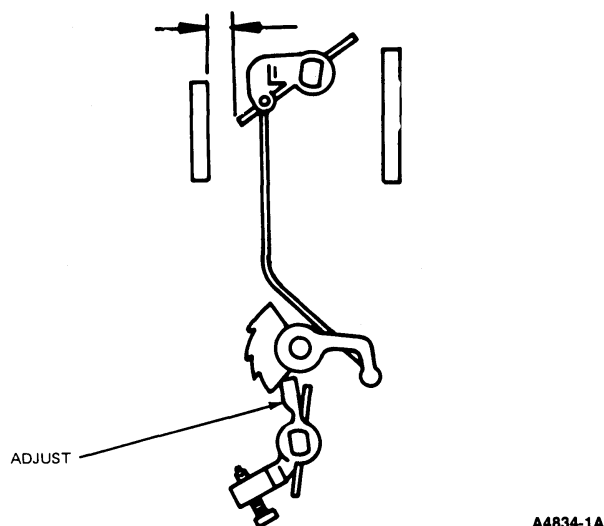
Dechoke—Holley 4180 C-4V (Hot Air with Electric Assist) Carburetor
